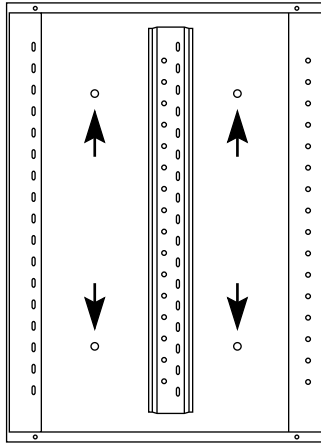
Putting the mounting screws into the pilot holes.
